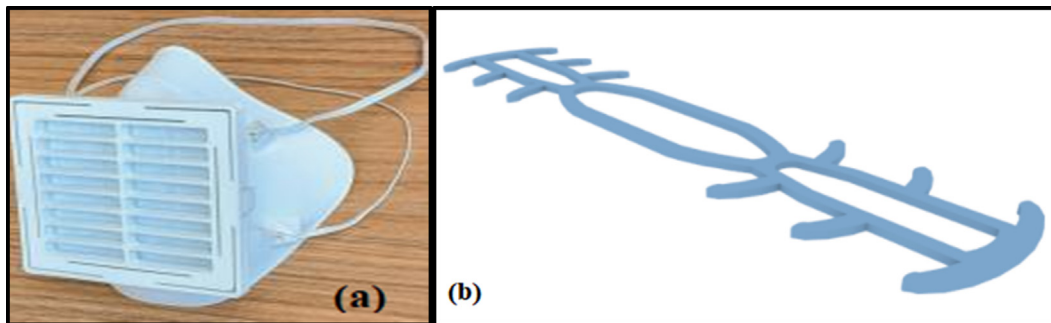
(a) Face mask and support parts made Stopgap surgical face mask [35] (b) Ear saver designed by NIH 3D Print Exchange [36].
